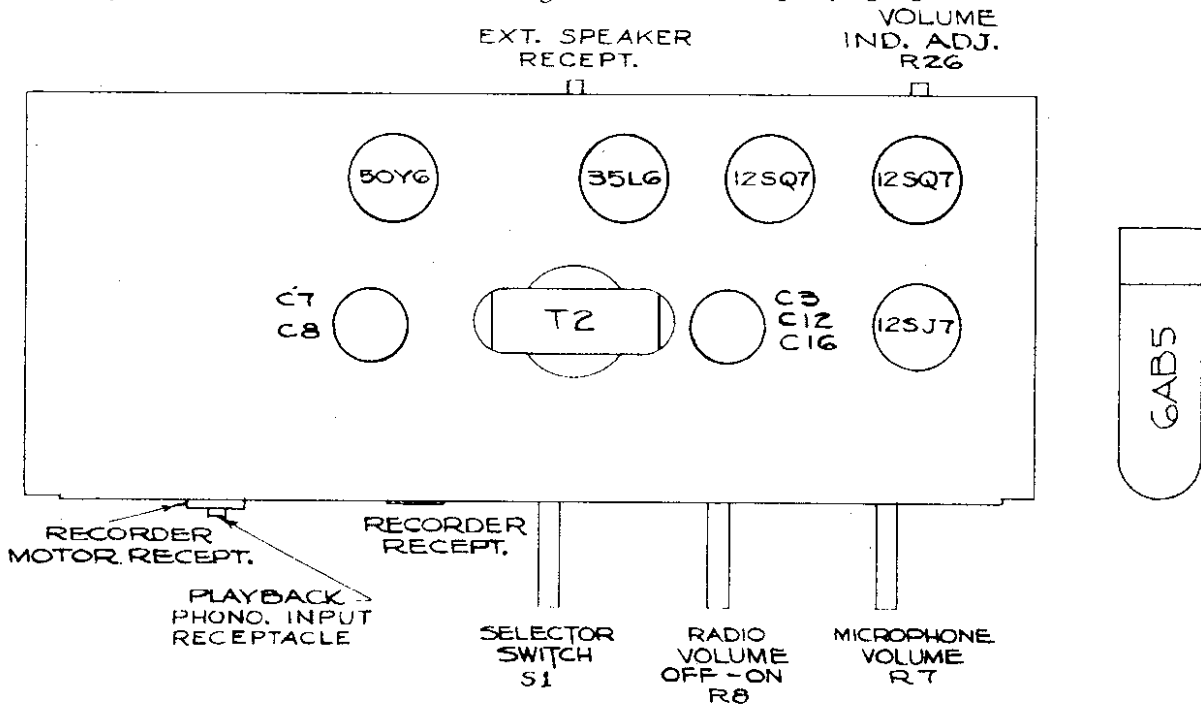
TUBE LOCATION AND PARTS LAYOUT TOP VIEW CHASSIS 133
